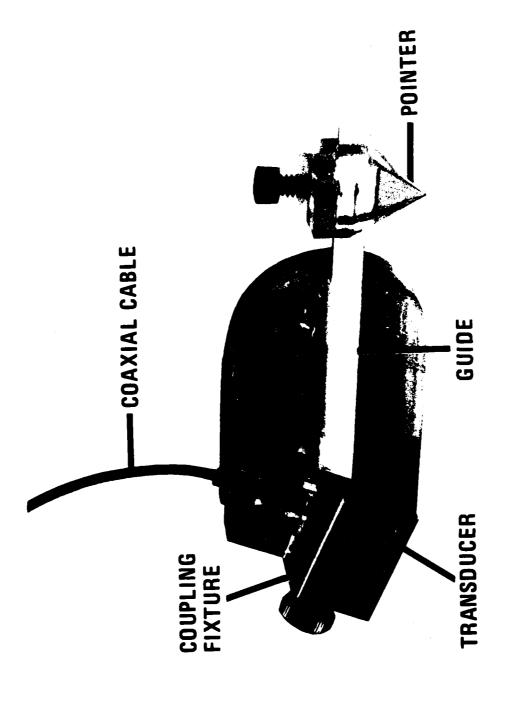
TRANSDUCER HOLDER – ANGLE BEAM TECHNIQUE
